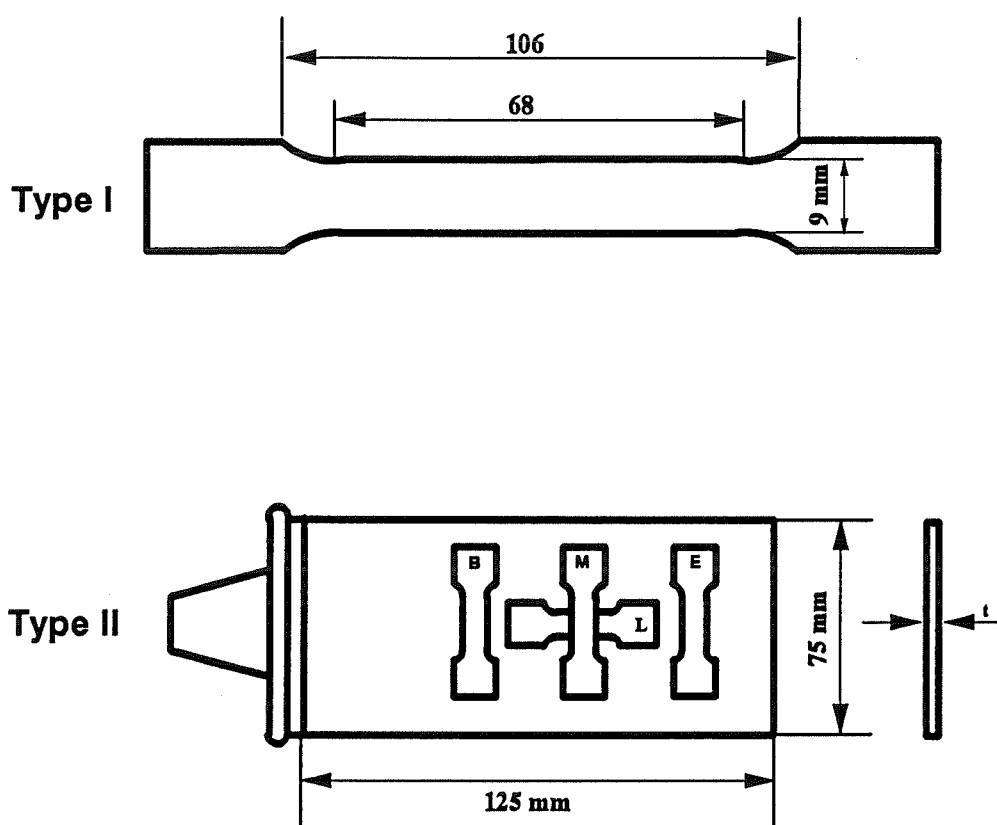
Mold cavities used in this work. Type I molded tensile specimens. Type II- rectangular plaque with location at which samples were machined.
